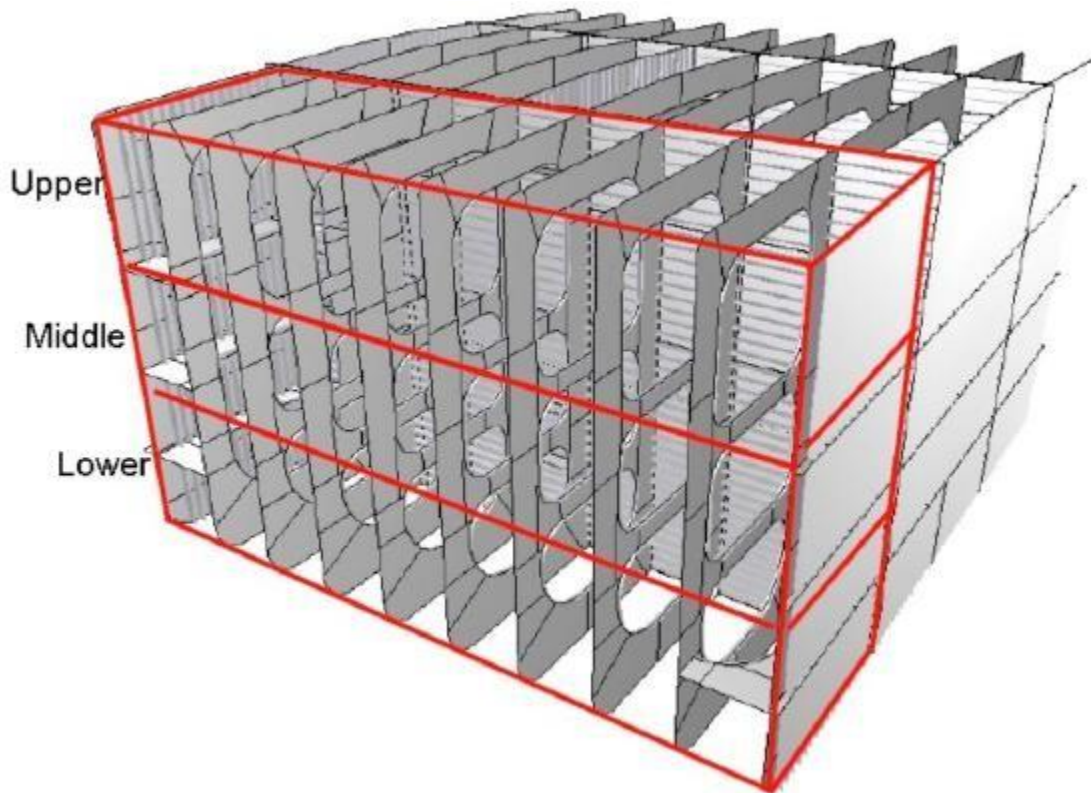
(3) Typical Area under Consideration for Oil Tanker Structures
